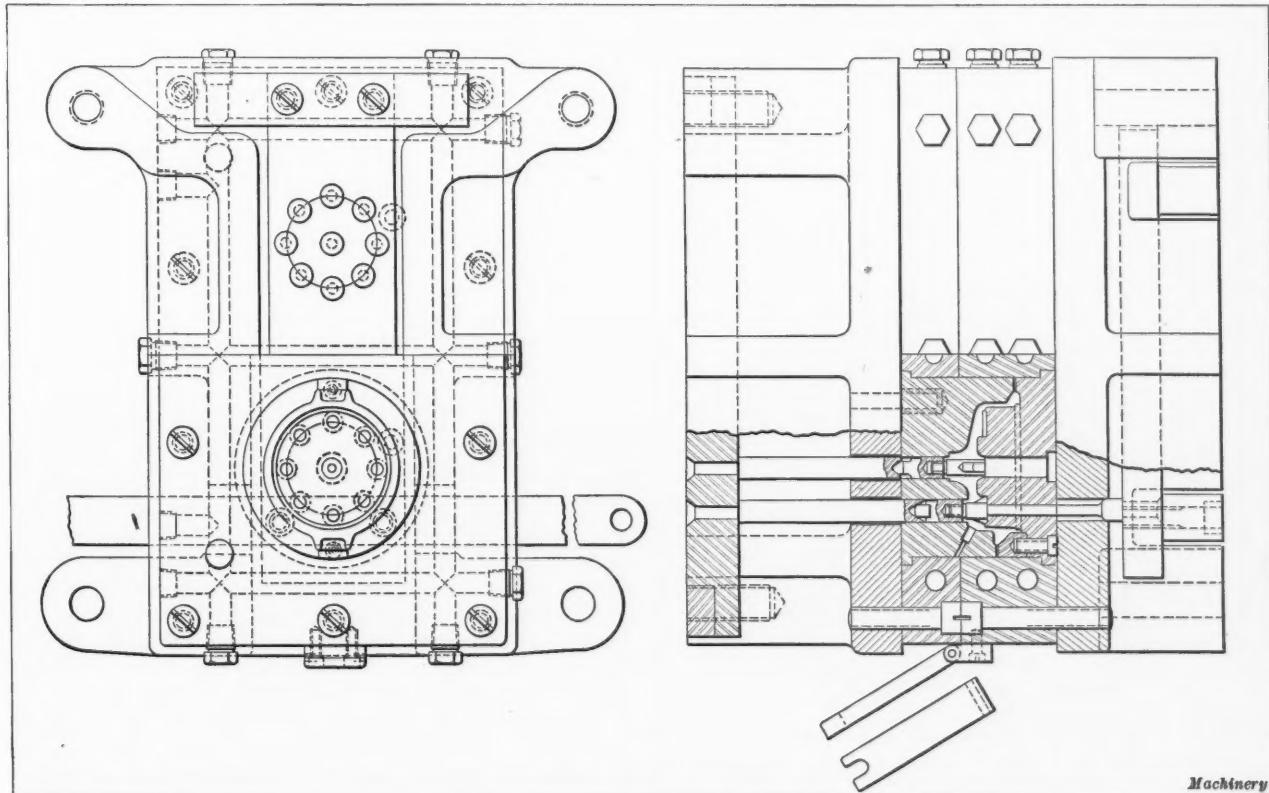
Molding Die used in making Distributor Head for Ignition System of Eight-cylinder Engine. Attention is called to Arrangement of Ducts through which Steam and Water circulate in Order to heat Die for Molding Operation and to cool it for removing Work
